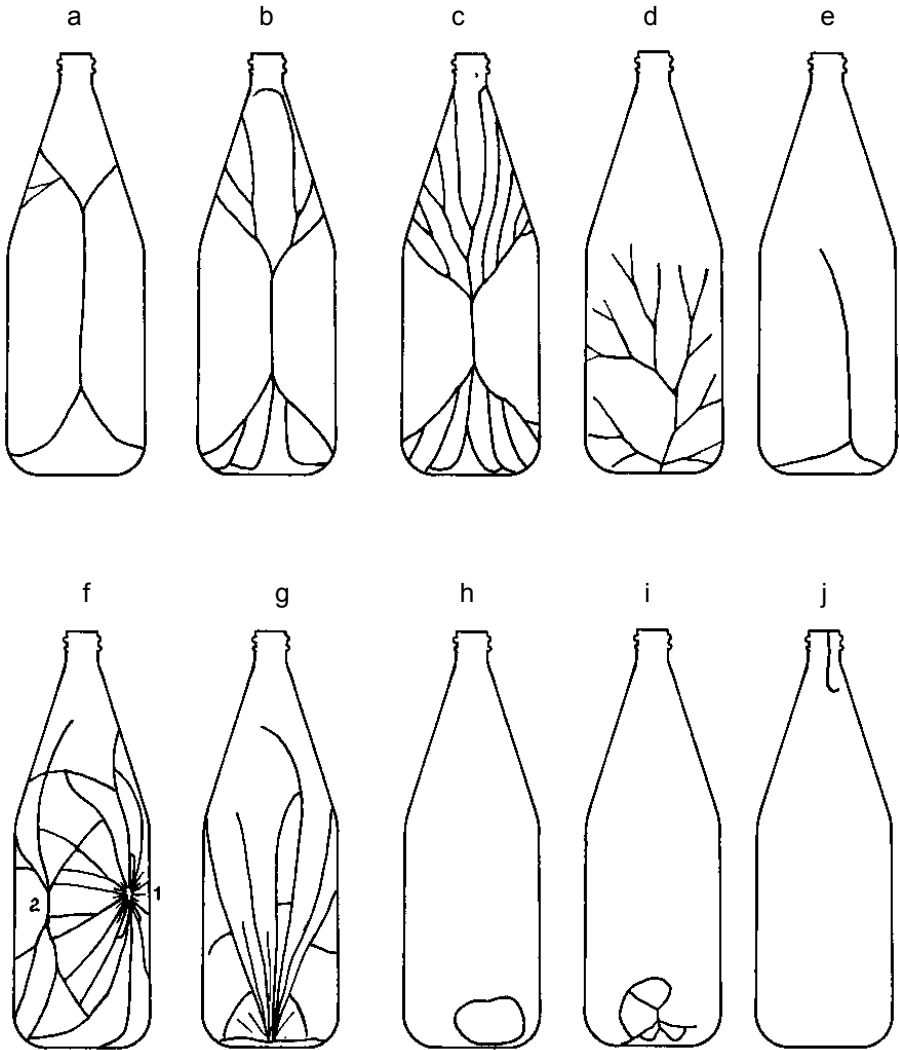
Bottle fracture patterns. (a-c) sidewall fractures due to internal pressure at progressively greater pressures; (d) internal pressure fracture starting from the base; (e) is a thermal fracture from sudden cooling of the base; (f) is an impact fracture on the right side (labeled 1) with a hinge fracture on the side (labeled 2); (g-i) show water hammer fractures and (j) shows a fracture from diametral rim clamping.
